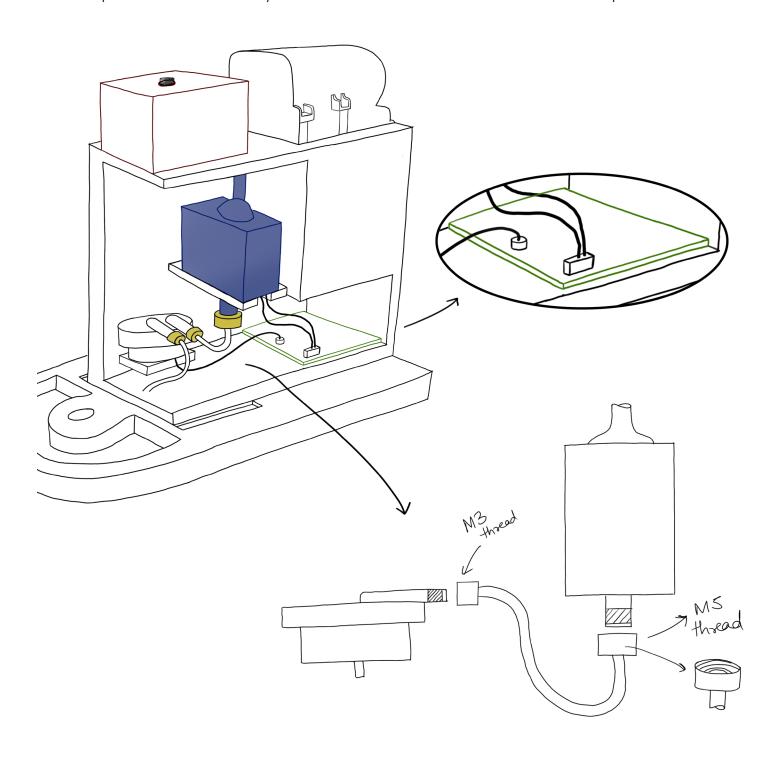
Wire connector shape and threaded hoses to prevent incorrect assembly
